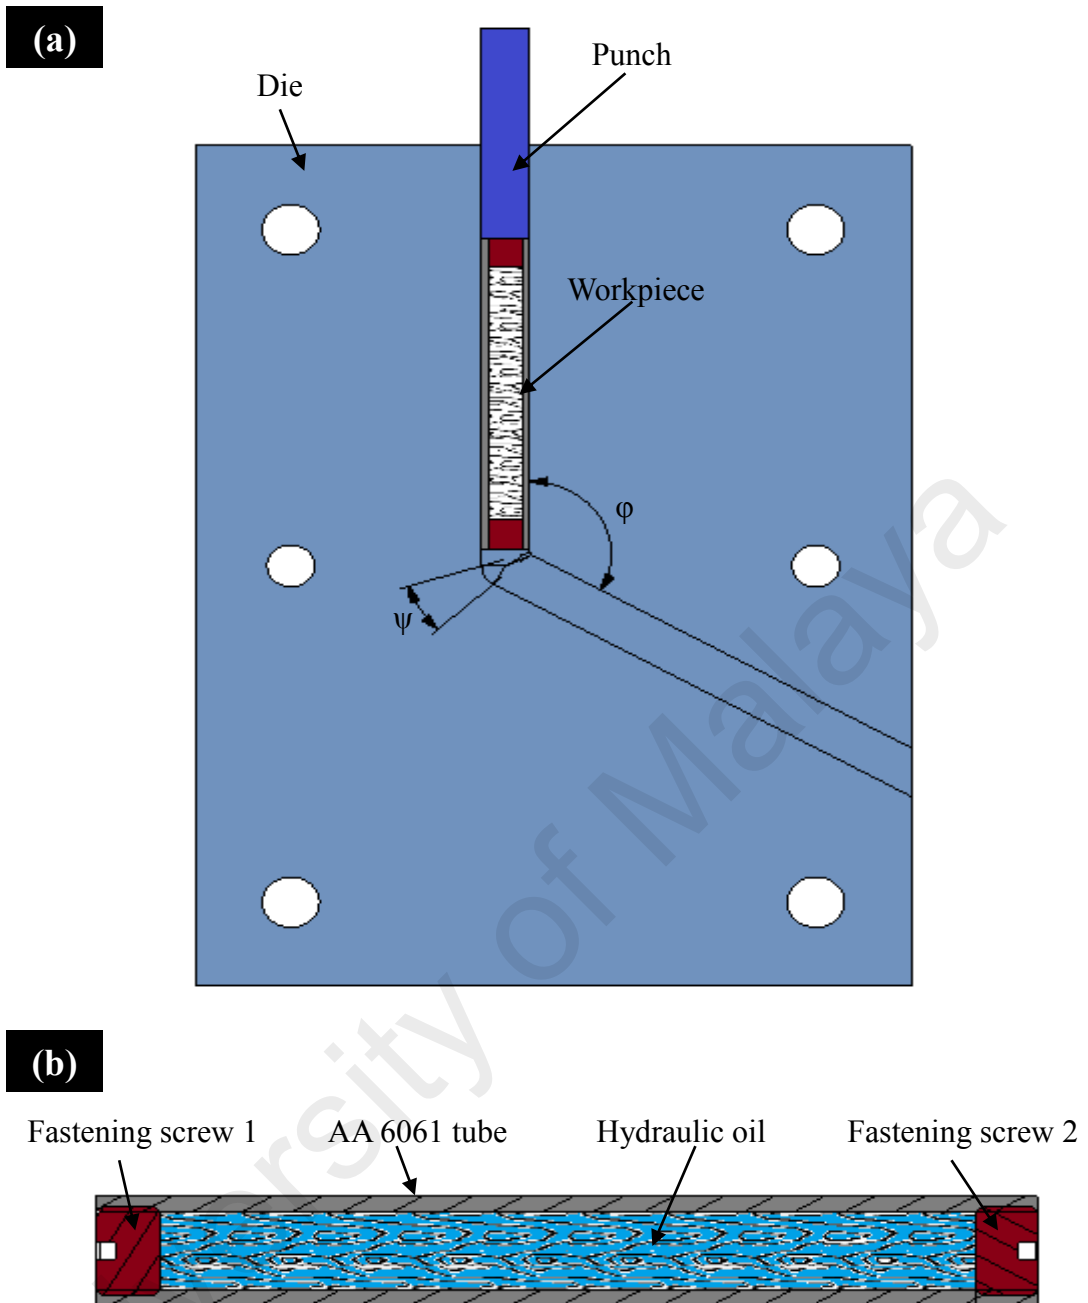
Schematic illustration of (a) the tube-ECAE principle and (b) the assembly of the initial workpiece
